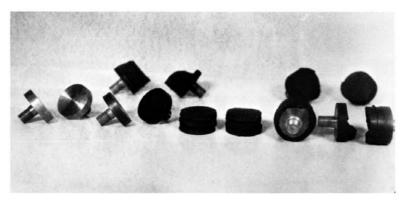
Views of a Typical Test Specimen Showing Individual Metal Parts and Rubber Cylinders
